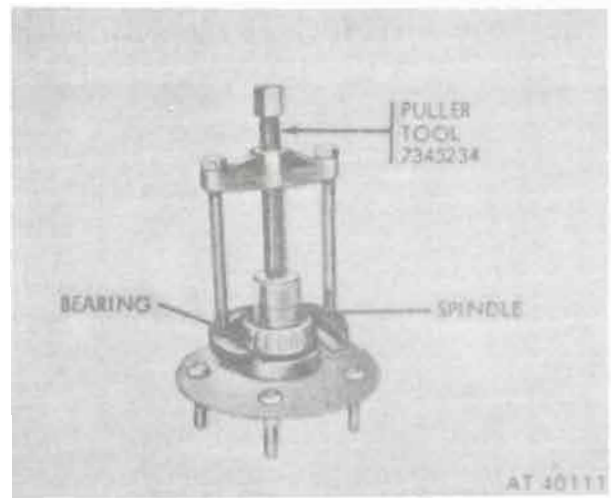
Using puller 7345234 to remove bearing from spindle.
